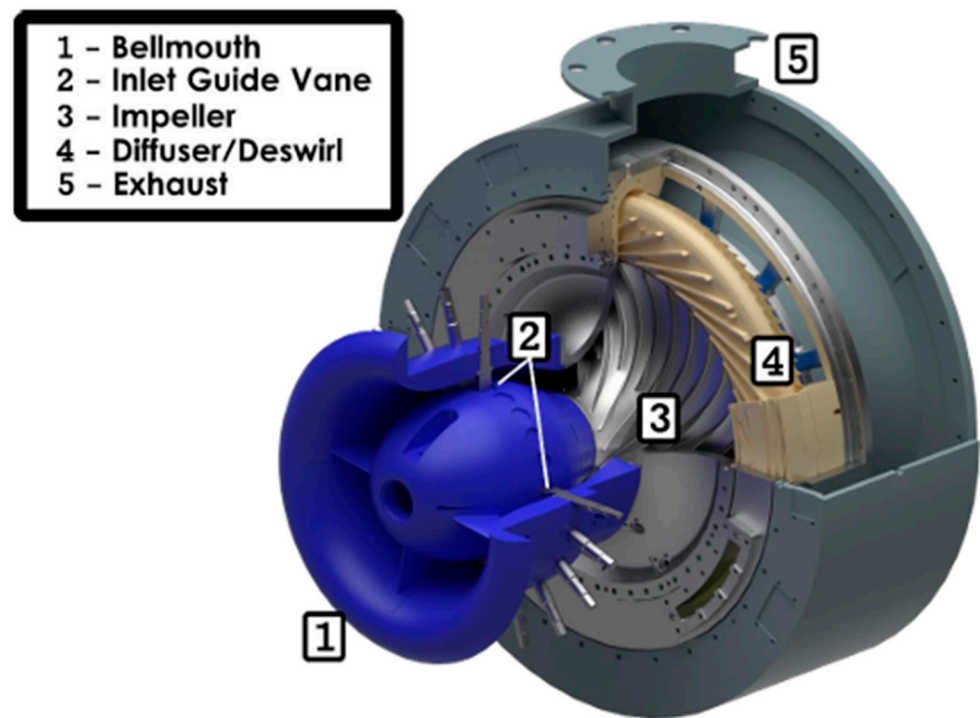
CSTAR Gen 2.5 compressor cutaway [22].
